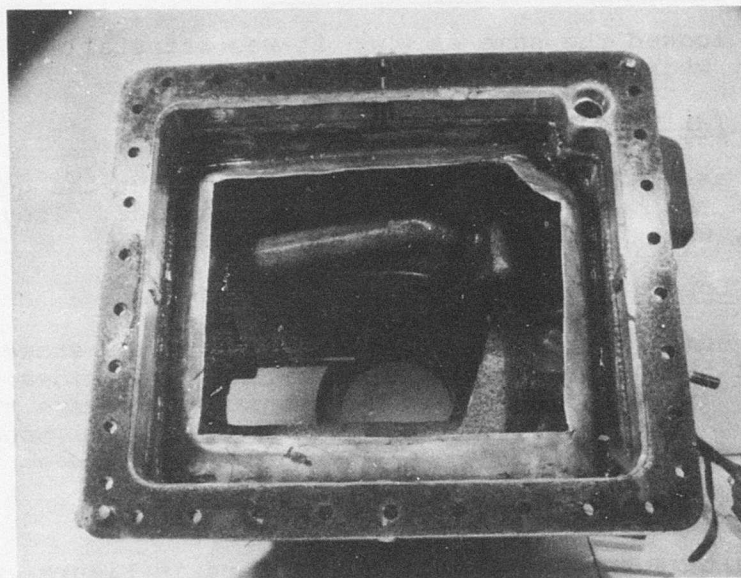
Upper sump case following 4.0-hour emergency lubrication run.
